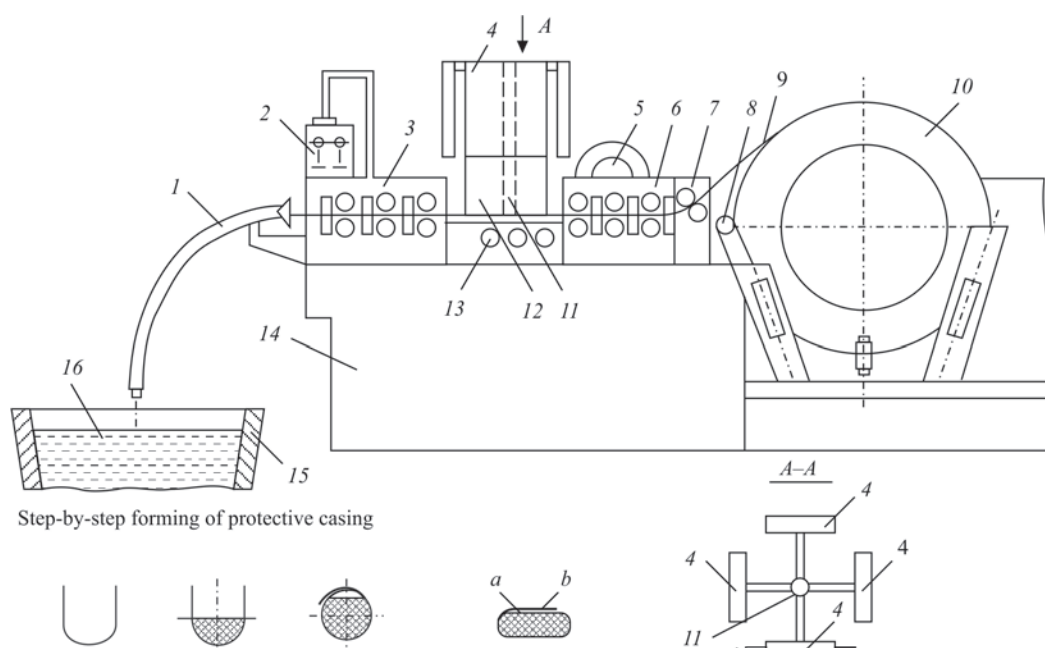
Technological complex of ladle treatment of melts using flux-cored wires: *1* — guide; *2* — control panel; *3* — forming-sizing stand; *4* — measuring hopper system; *5* — electromechanical group drive; *6* — forming stand; *7* — guide rollers; *8, 9* — tension device; *10* — decoiler with winded strip; *11* — rotating turret; *12* — protective casing; *13* — support rollers; *14* — frame; *15* — metallurgical capacity; *16* — melt; *a, c* — strip flanges overlapping
